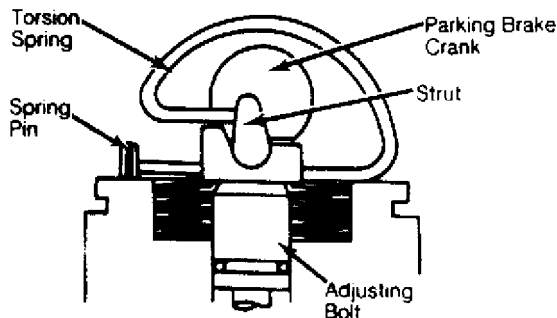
Installing Conical Spring and Adjusting Bolt on RX7 Rear Caliper
